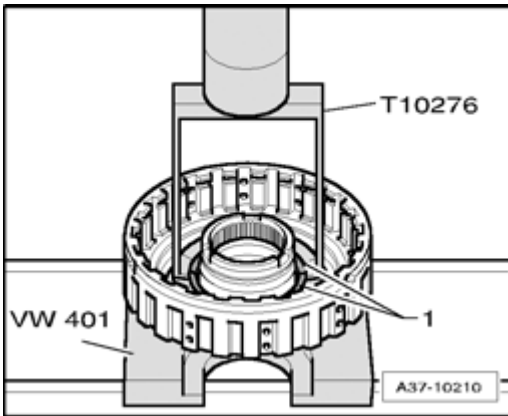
Installation Bracket T10276 And Split Retaining Ring
